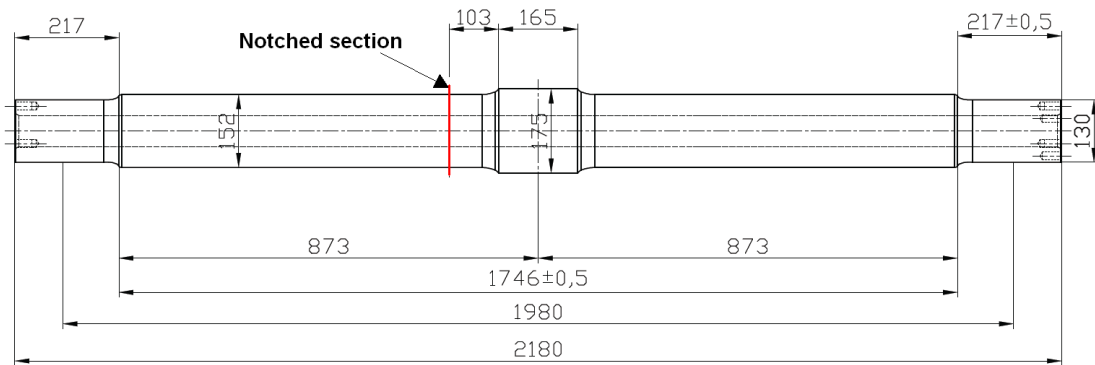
Full-scale specimen, made of A4T batch B, tested against load spectrum
